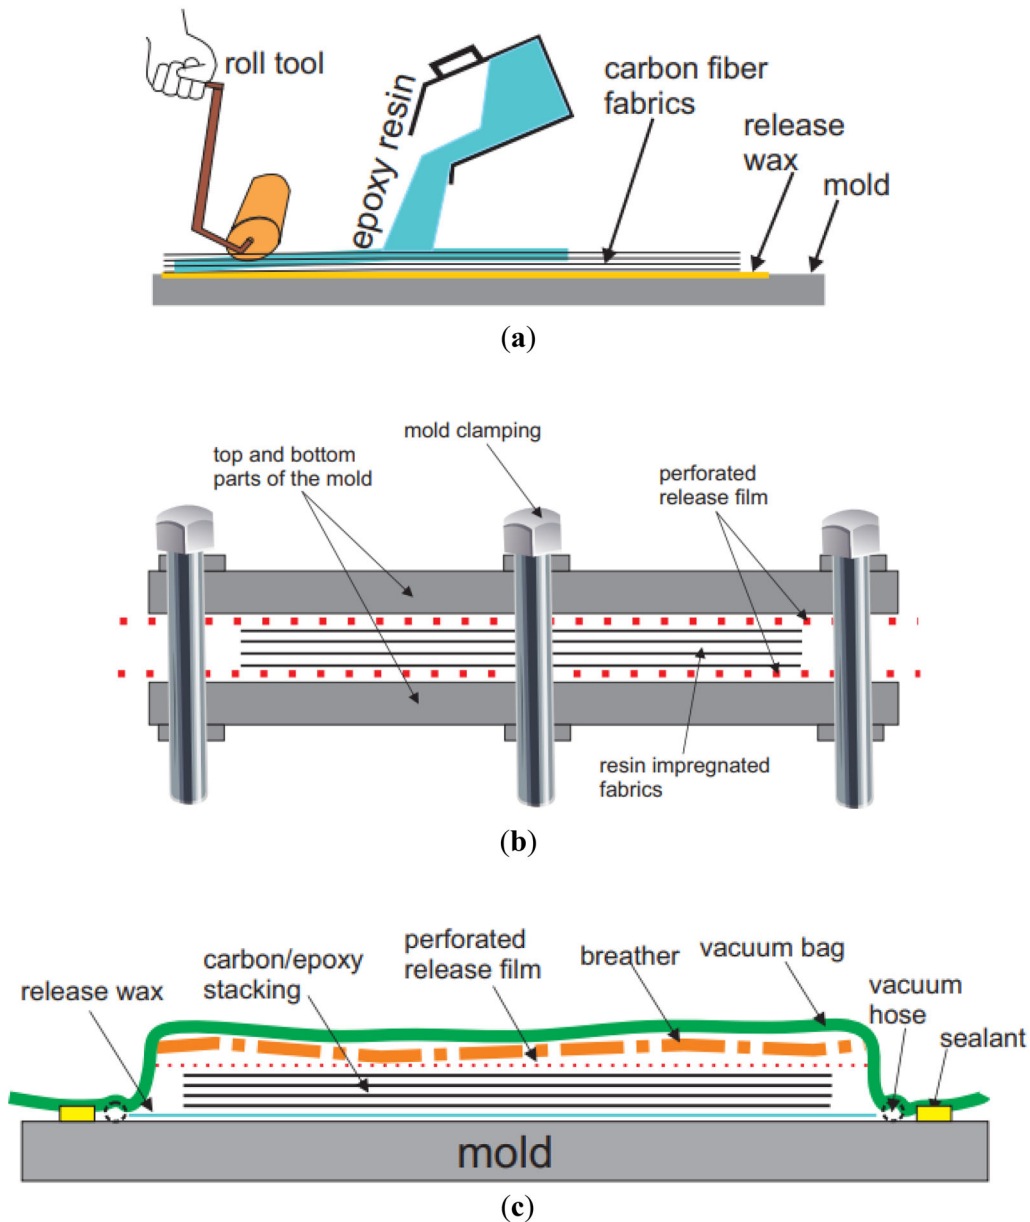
Schematic views of the production methods; (a) hand lay-up, (b) compression moulding, (c) vacuum bagging.
